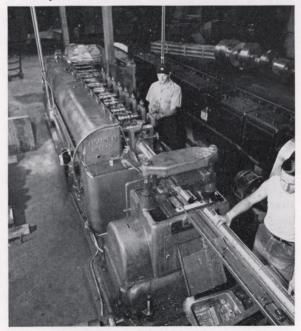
Eight-station continuous-roll-forming machine exits work through a sizing die and into a flying shear which automatically cuts it to required length. The machine is fed aluminum in the form of coiled strip.
